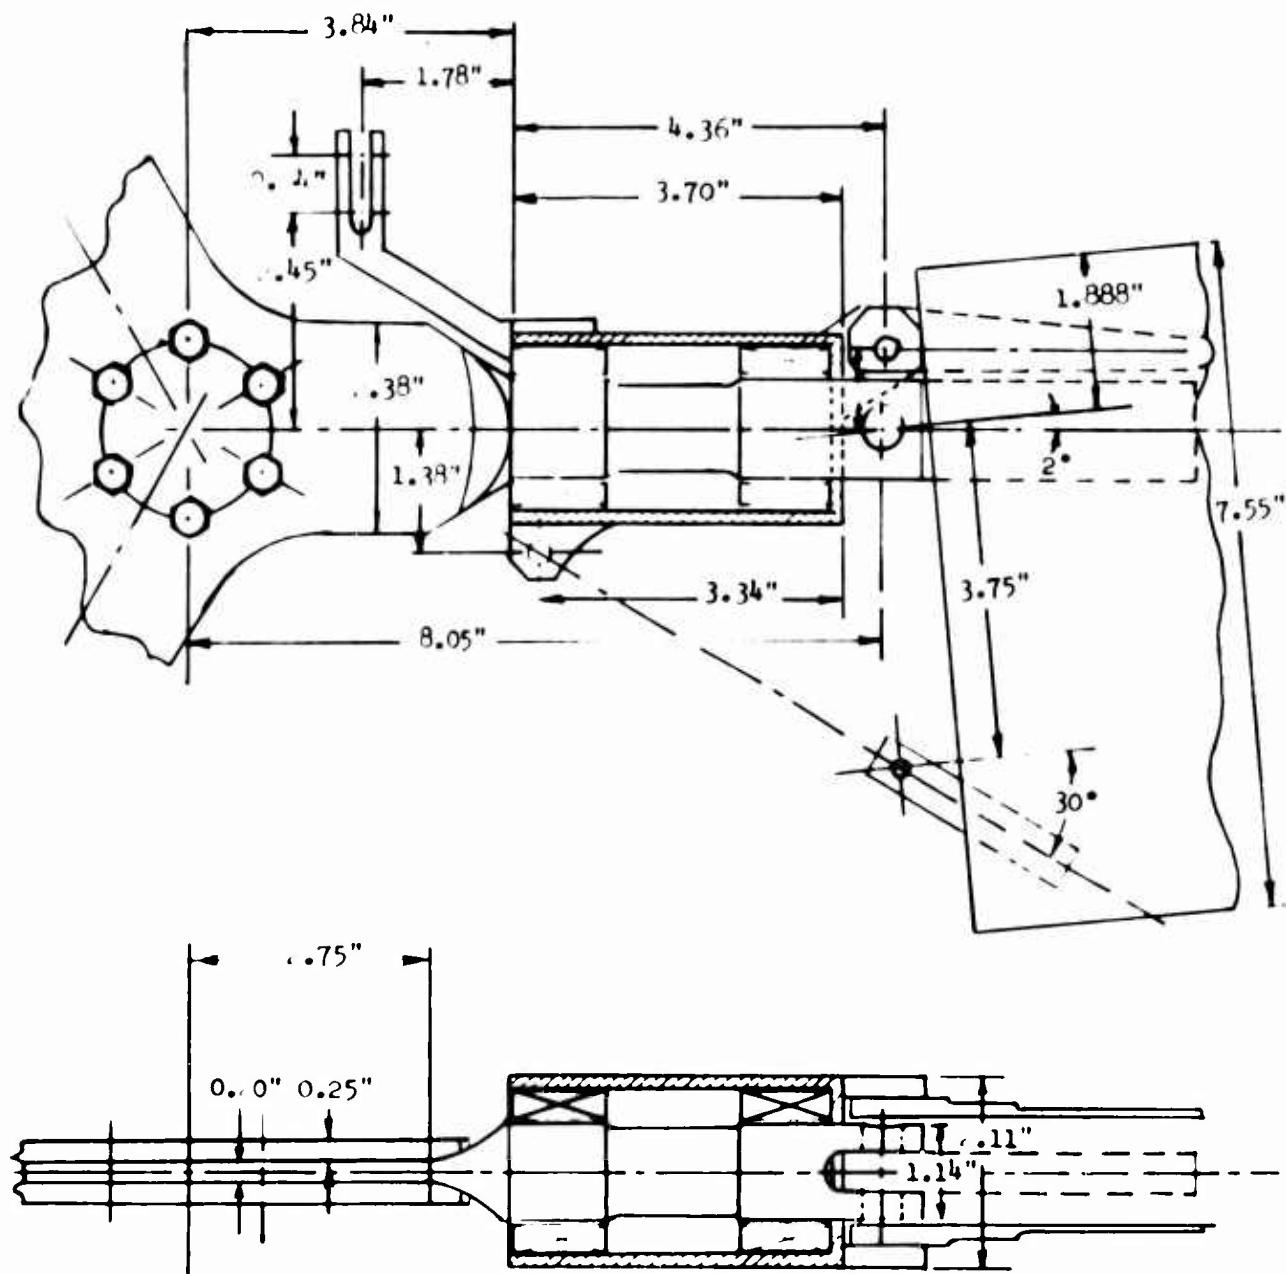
GEOMETRY OF THE HUB-SPINDLE ASSEMBLY
